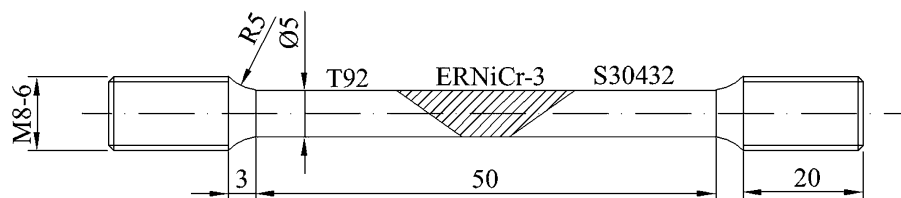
Dimension and size of employed tensile cross-weld creep specimen
